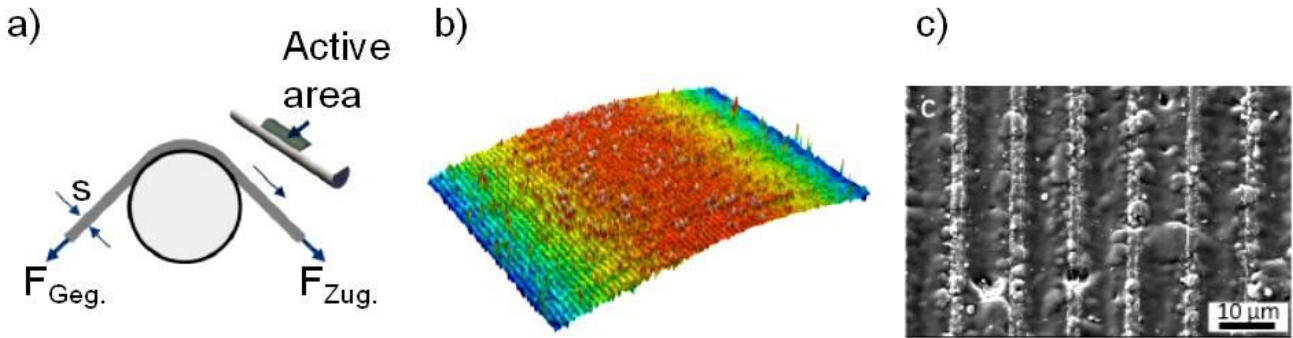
Laser structuring of bend surfaces. (a) Representation of the drawing ring radius during the wrapping of the work piece (draw bend tests); (b) confocal microscope and (c) SEM images of DLIP treated curve surface of a ta-C coated tool.
